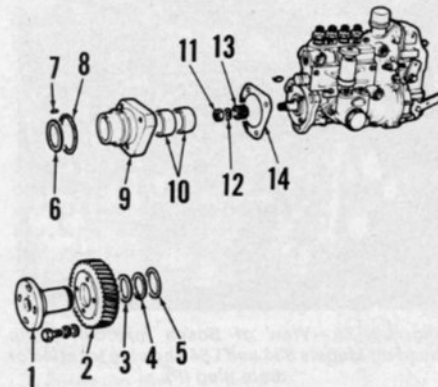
Exploded view of fuel injection pump drive assembly on Models 834 and L54.
